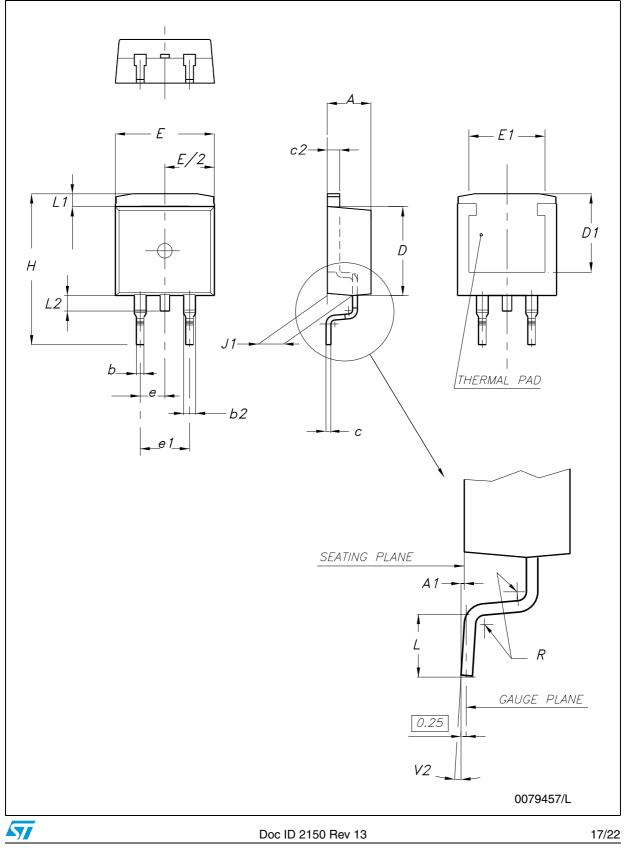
Drawing dimension D²PAK (type WOOSEOK-subcon.)
